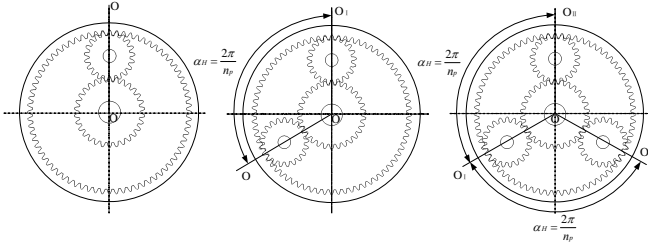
FIGURE I. ASSEMBLY RELATION OF SINGLE PIN PLANETARY MECHANISM
